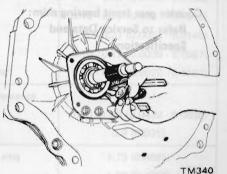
Fitting Main Drive Bearing Snap Ring
